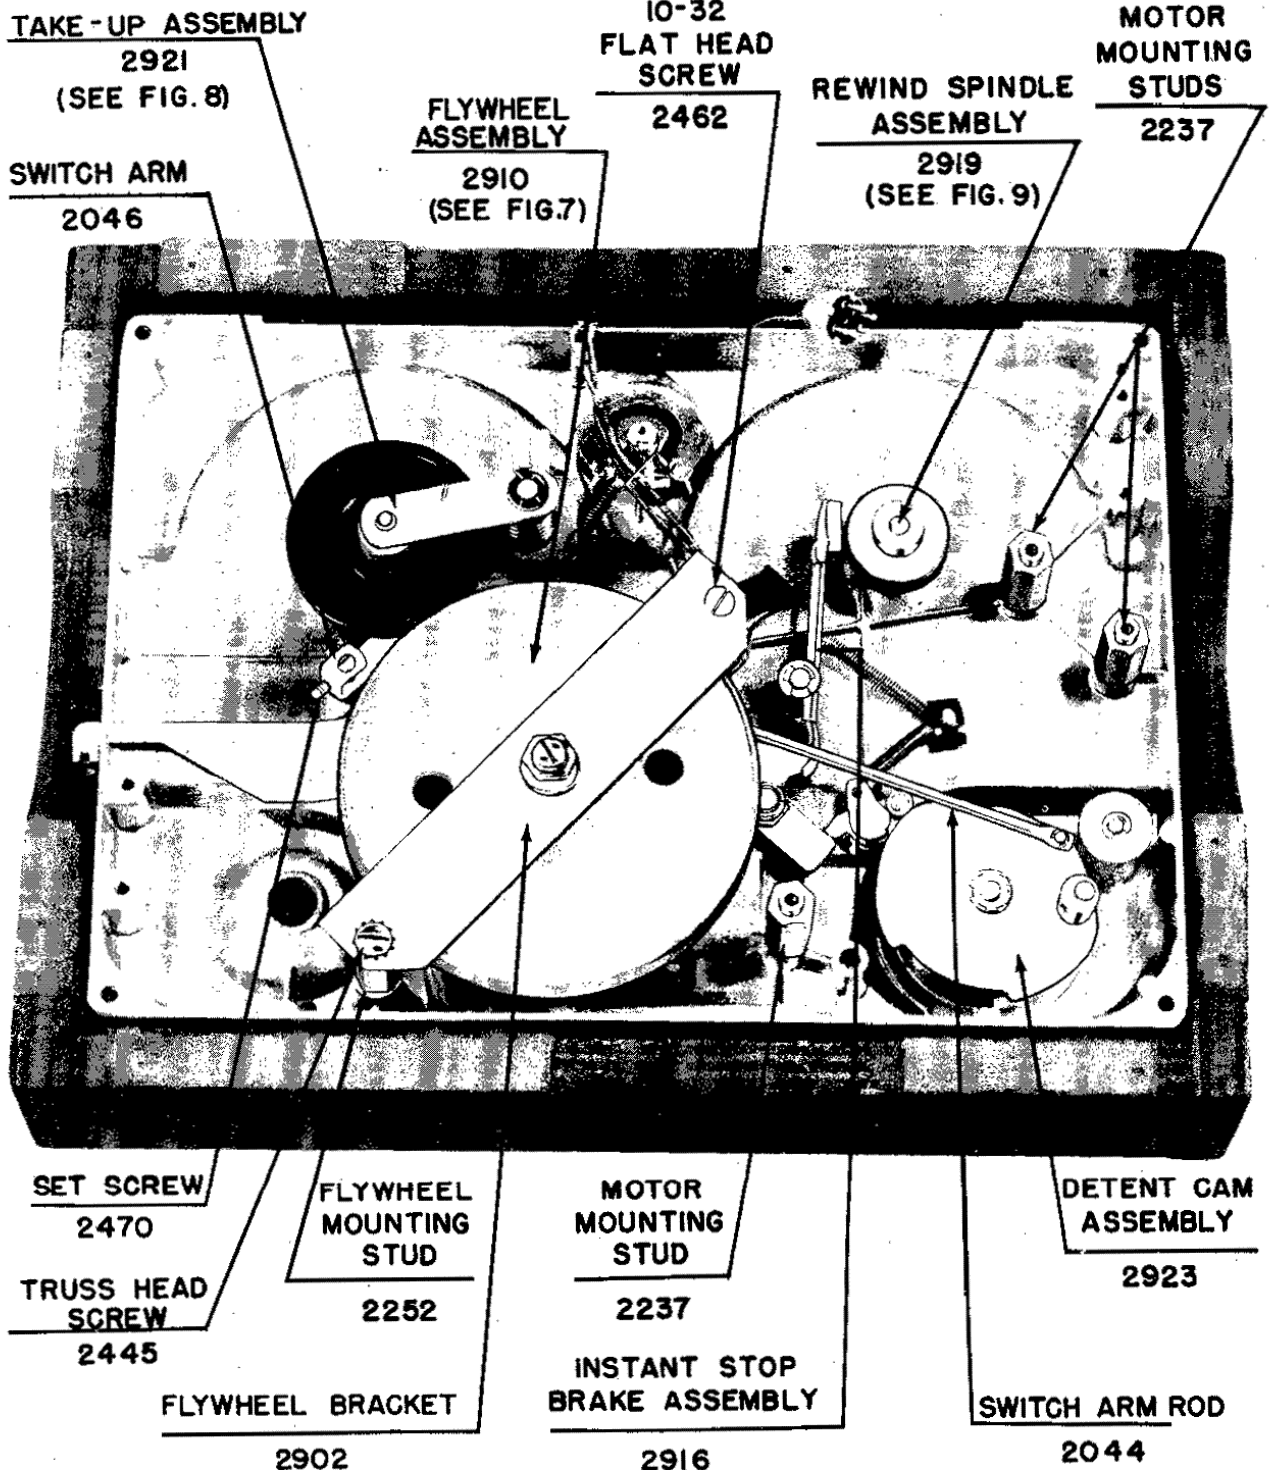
Bottom View of Recorder after Removing Motor Drive Assembly.
